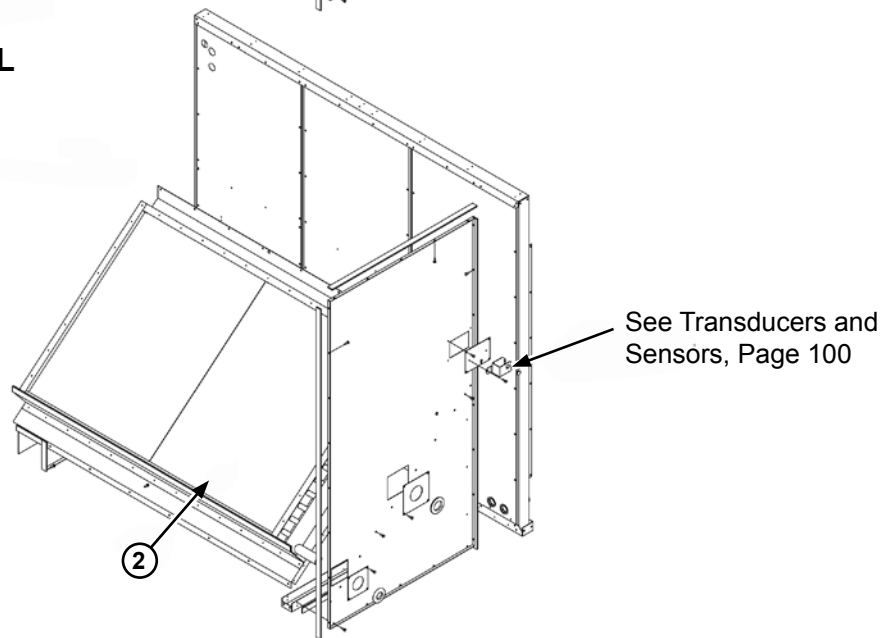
HOT WATER AND STEAM HEAT COILS
